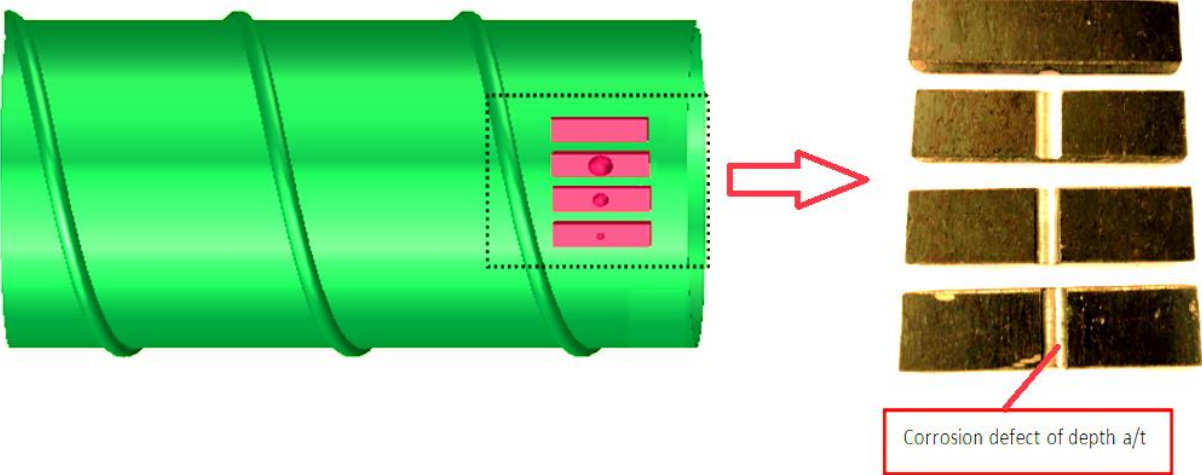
Location of bending specimen in API 5L X52 pipe with/without defect.
